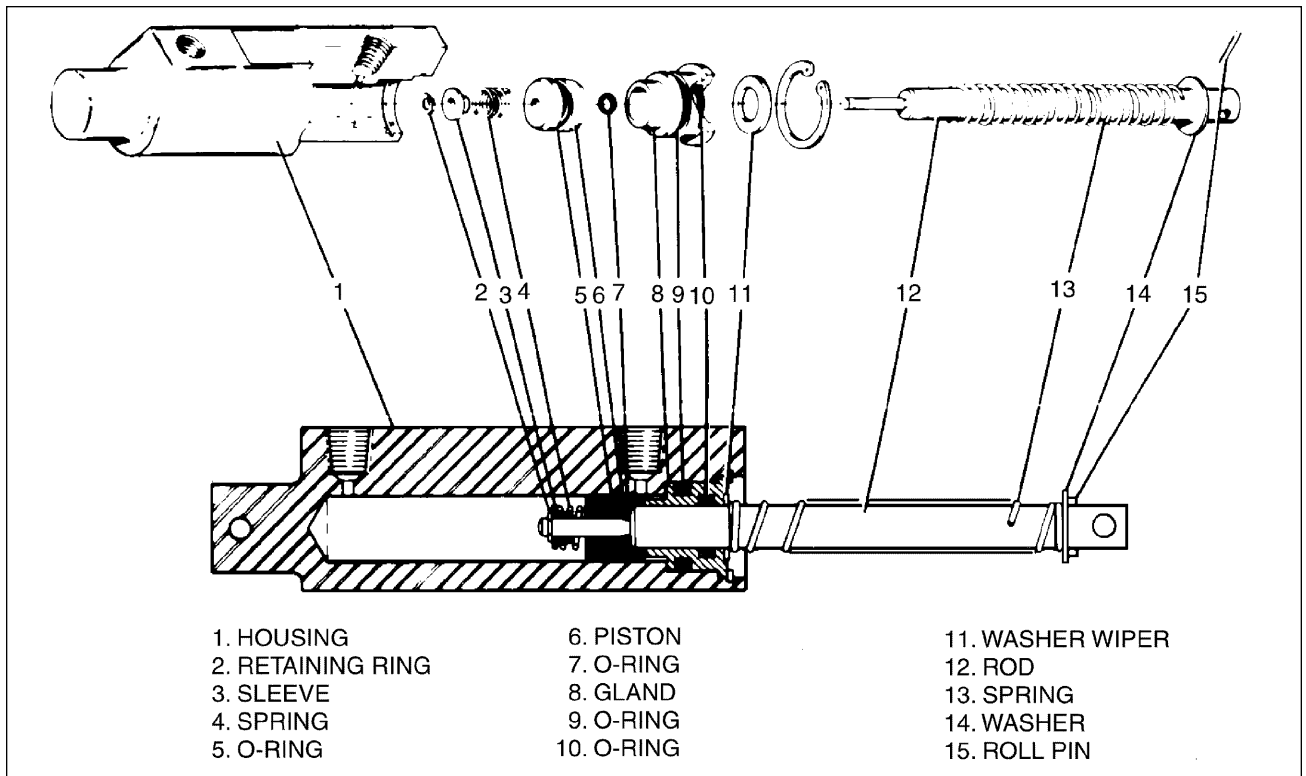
Cleveland 10-30 Toe Brake Cylinder
